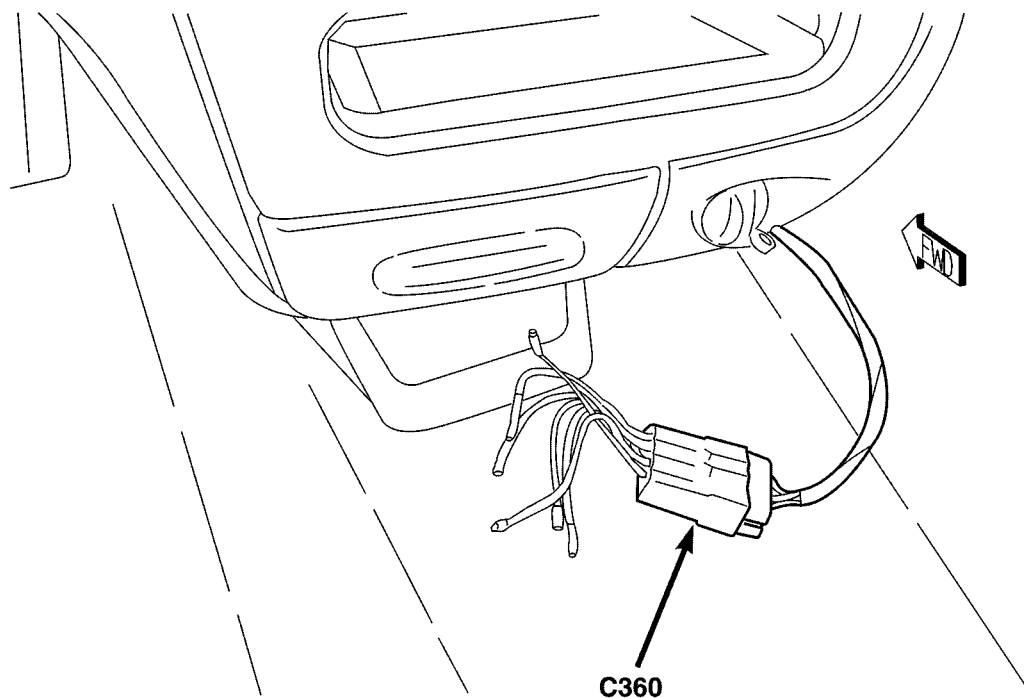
ACCESSORY EQUIPMENT CONNECTOR
